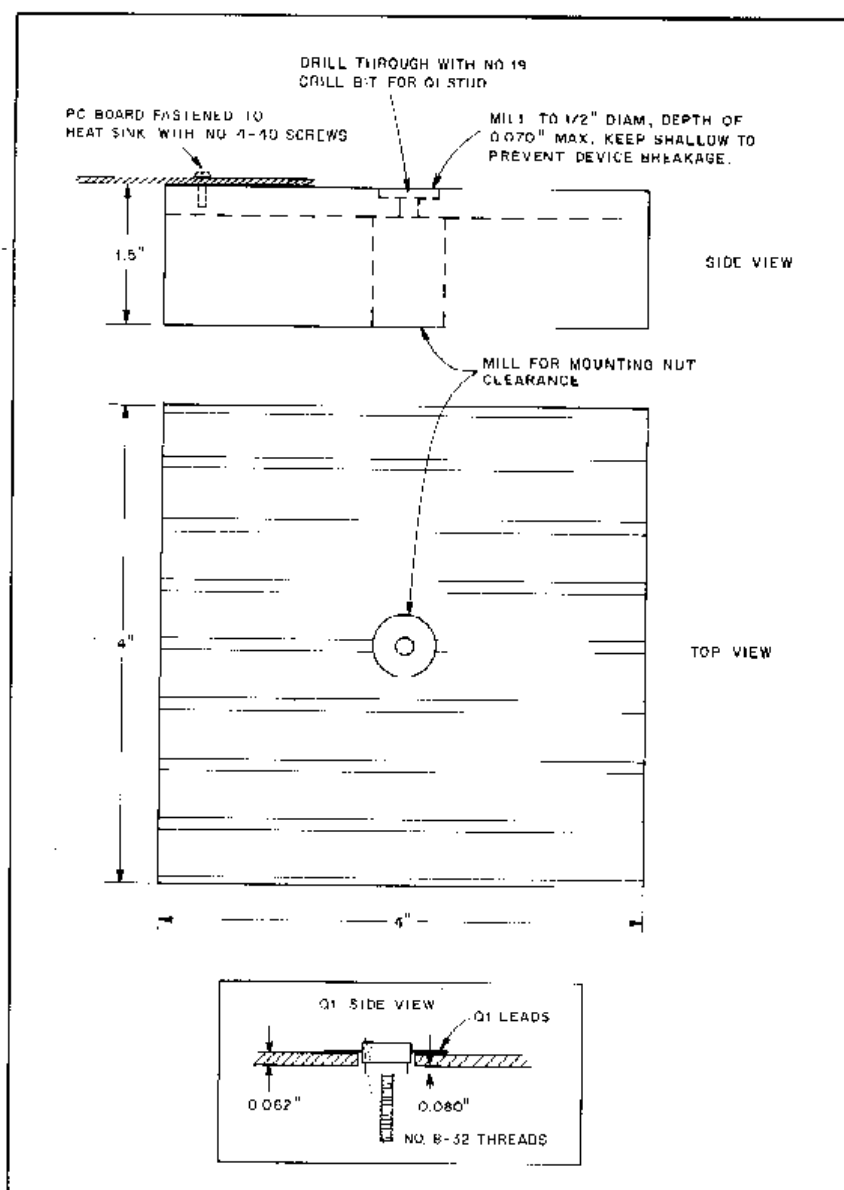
Heat-sink drilling dimensions for the VHF amplifiers. Overall heat-sink size isn't critical, but should be close to the dimensions shown. As an alternative to milling the heat sink to accept Q1, a piece of 1/16-in. double-sided PC-board material can be used as a shim. Be careful not to stress the transistor lead-to-body connections during mounting.
